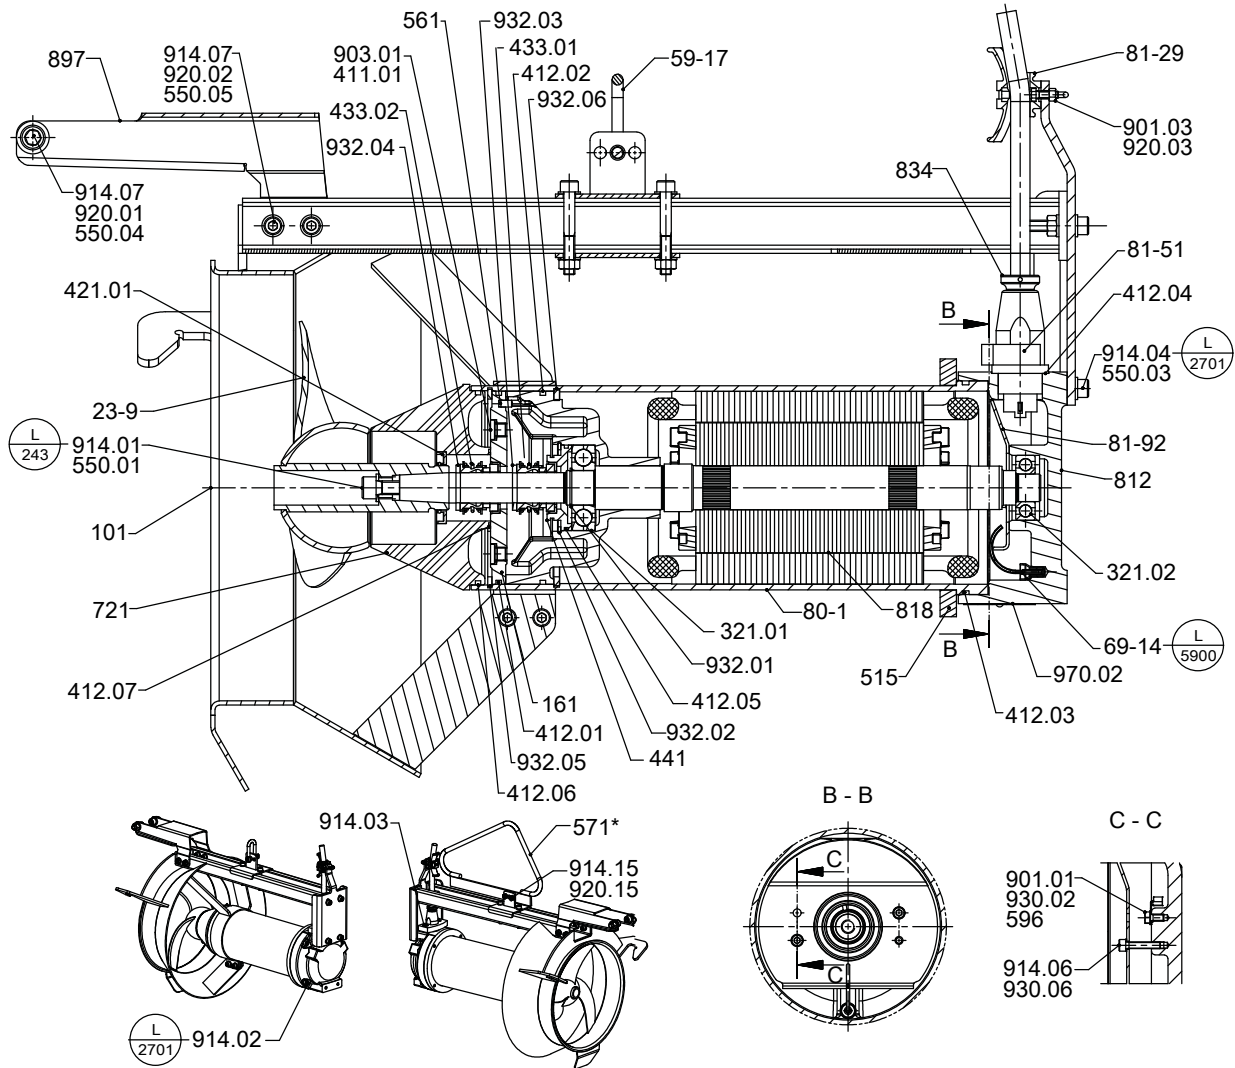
General assembly drawing: a) with shackle b) with bail (optional)
